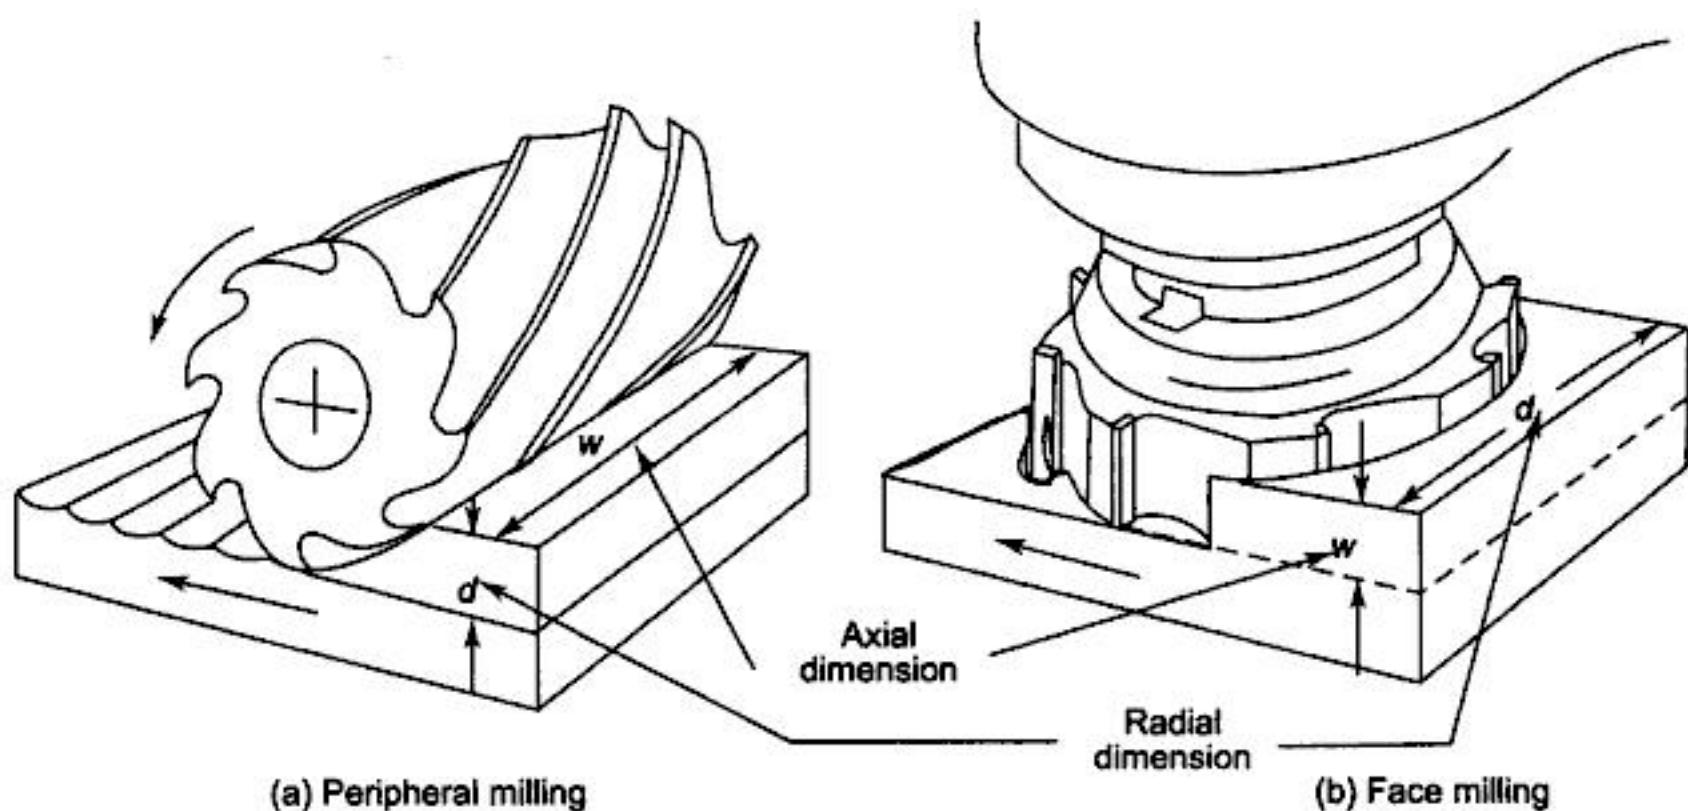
Generating plane surfaces in milling (using face milling).
